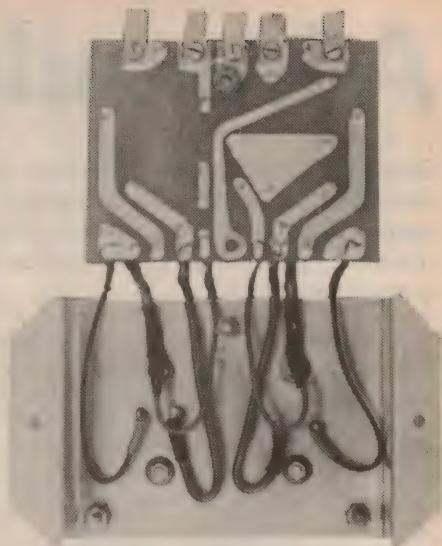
The board "unfolded" from the chassis, showing the flexible wiring arrangement to facilitate assembly.
